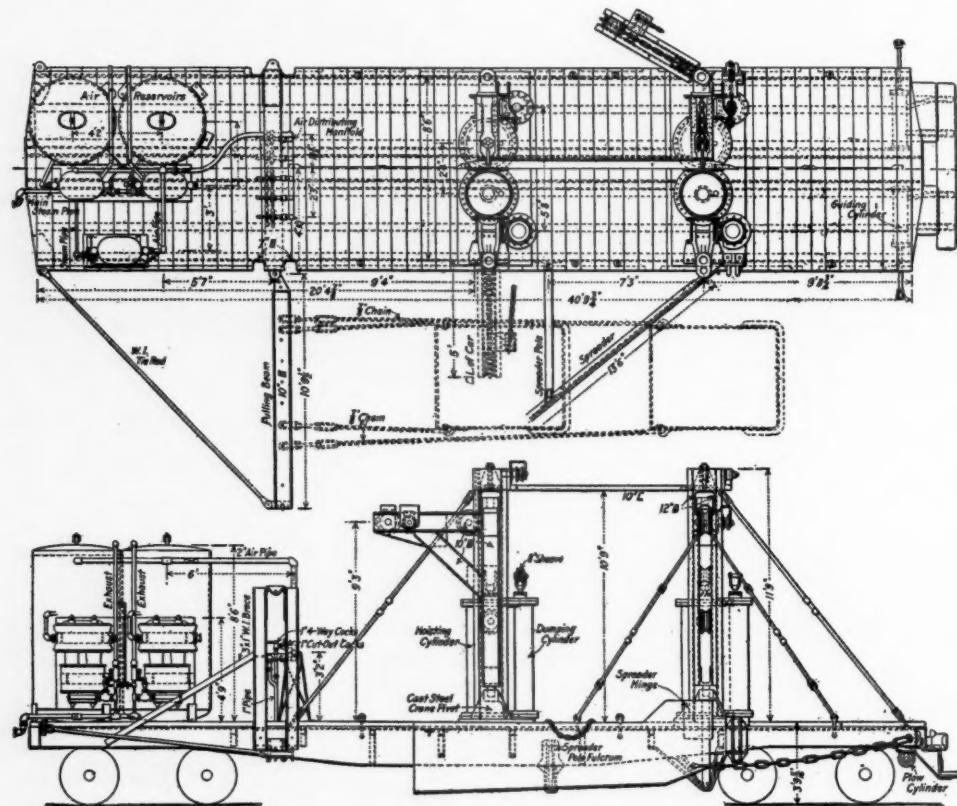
PLAN AND ELEVATION OF RAILROAD DITCHER.
